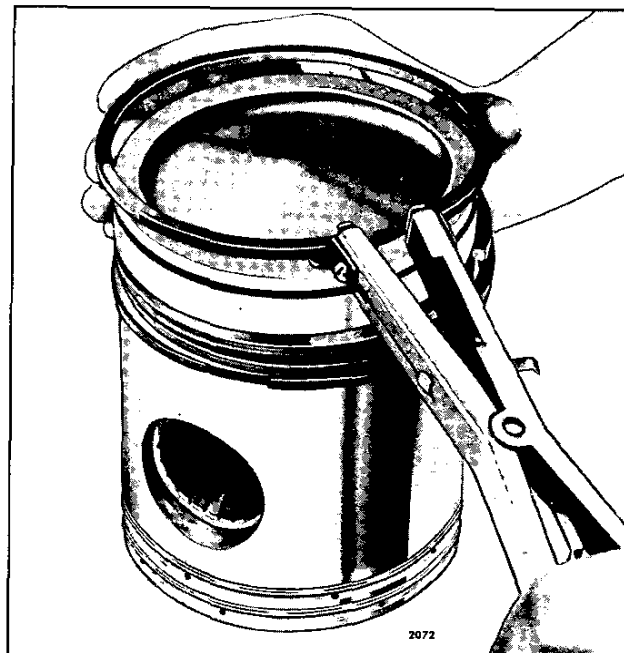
Removing or Installing Piston Ring Using Tool J 8128
